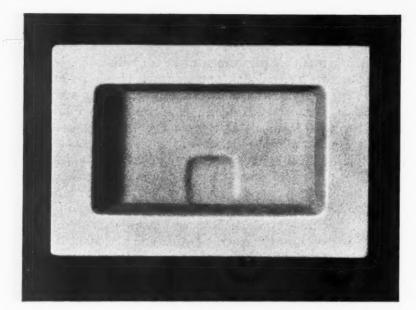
A nickel-sprayed aluminum casting used in the manufacture of airplanes
